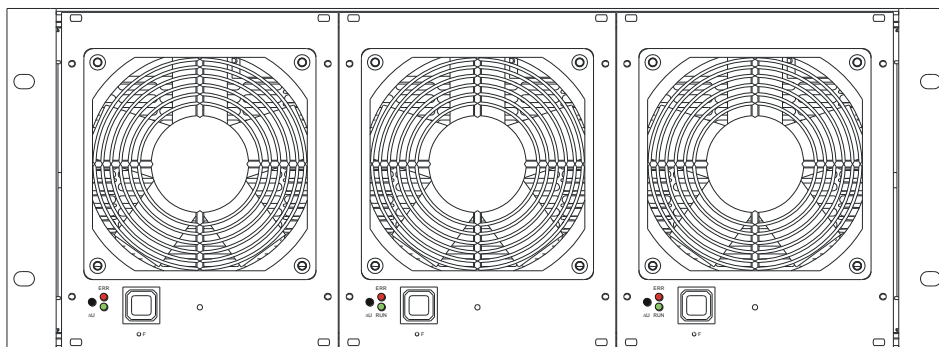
Front View of a Fully Equipped M 3421 Subrack
